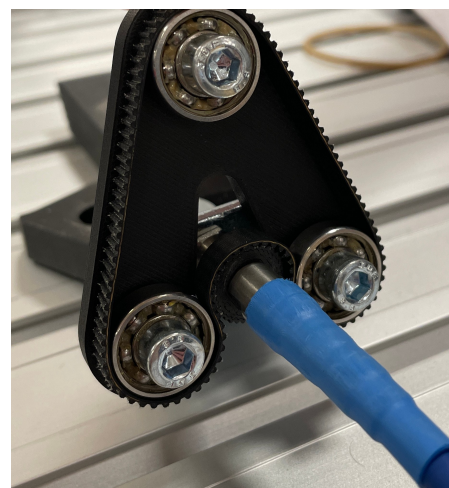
Concept evaluation of using a belt for rotating the threaded part of the cable.
